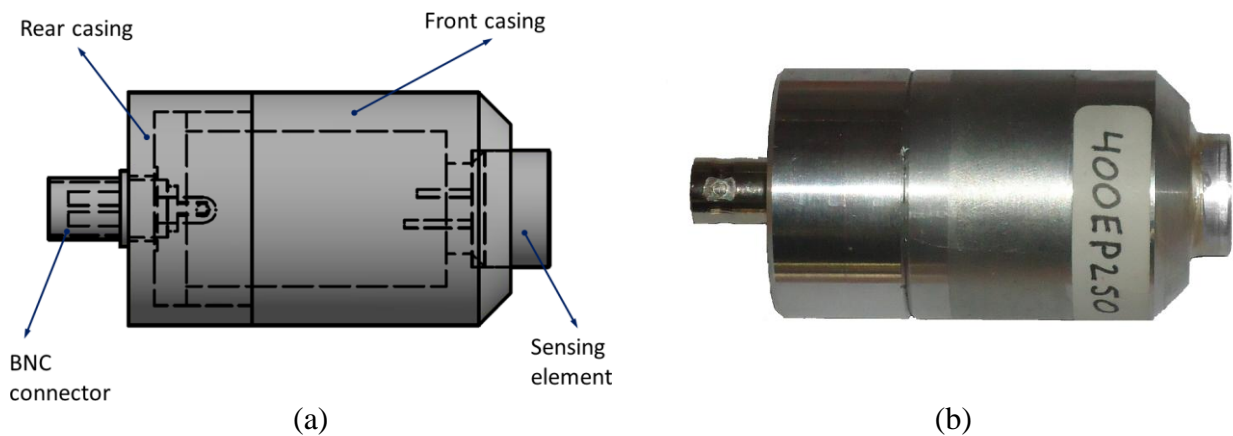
The developed low-cost ultrasound sensor; CAD model (a), photo after assembly (b).
